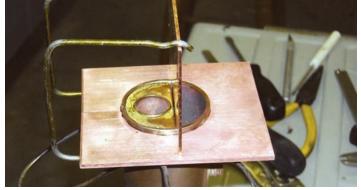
Fire box plates silver soldered to boiler; coat-hanger wire clamps everything in place.
